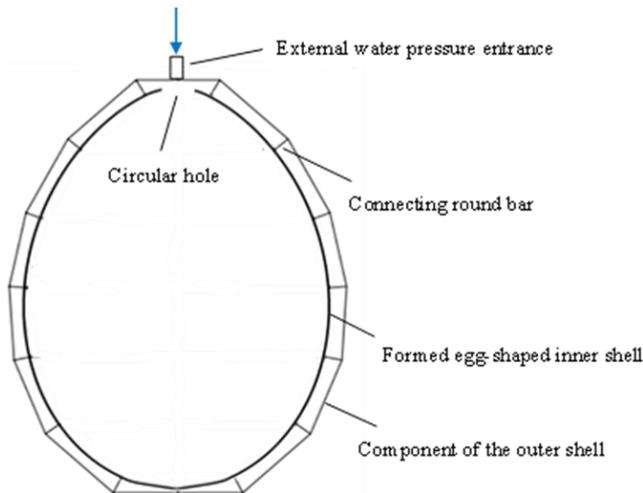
Cross-section of egg-shaped thin-walled laminated shell structure.
